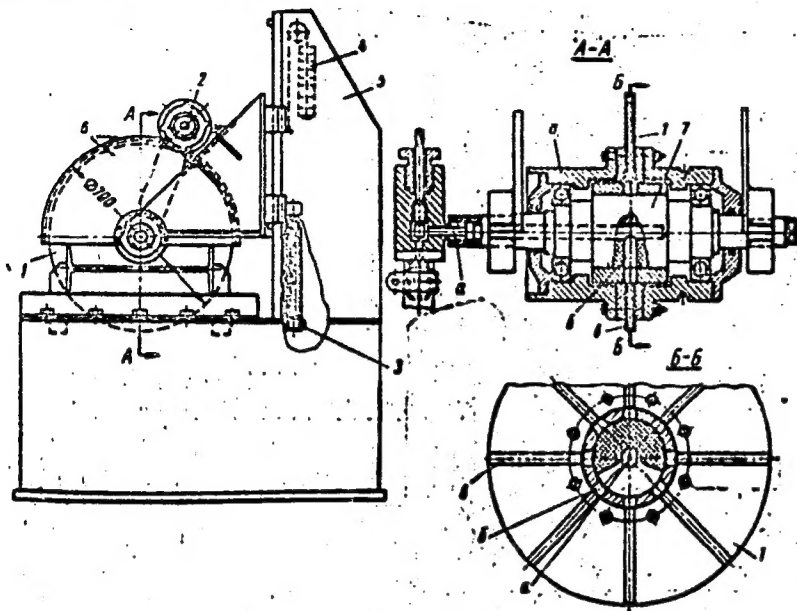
Machine for air metal-arc cutter (general and side views): 1 - disk electrode; 2 - disk servo-rotor, 3 - disk servo-feed; 4 - counterweight; 5 - frame; 6 - disk casing; 7 - axis; 8 - connecting piece.
